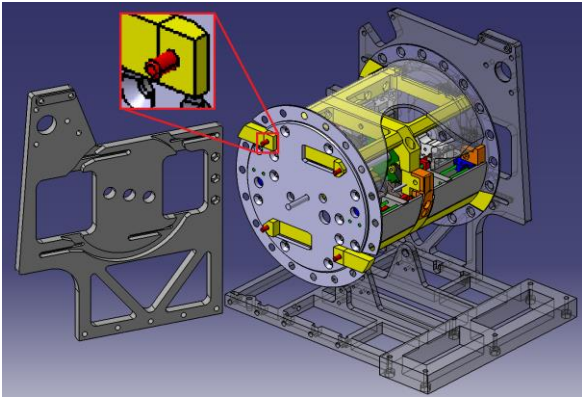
Components required for boom spool latching like main body side plate with straight and circular grooves as well as bolts (red) installed in the larger sliders of the spool.
